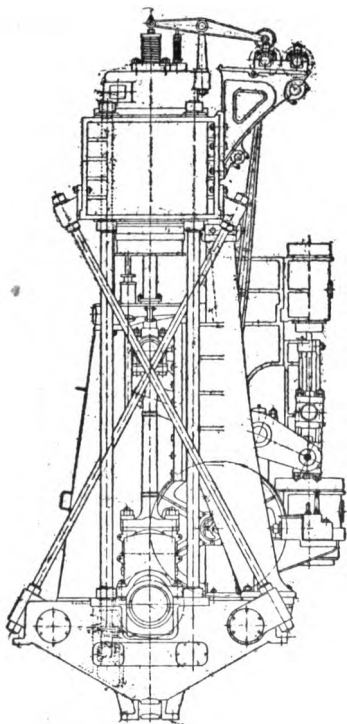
End Elevation—Werkspoor Diesel Engine.
